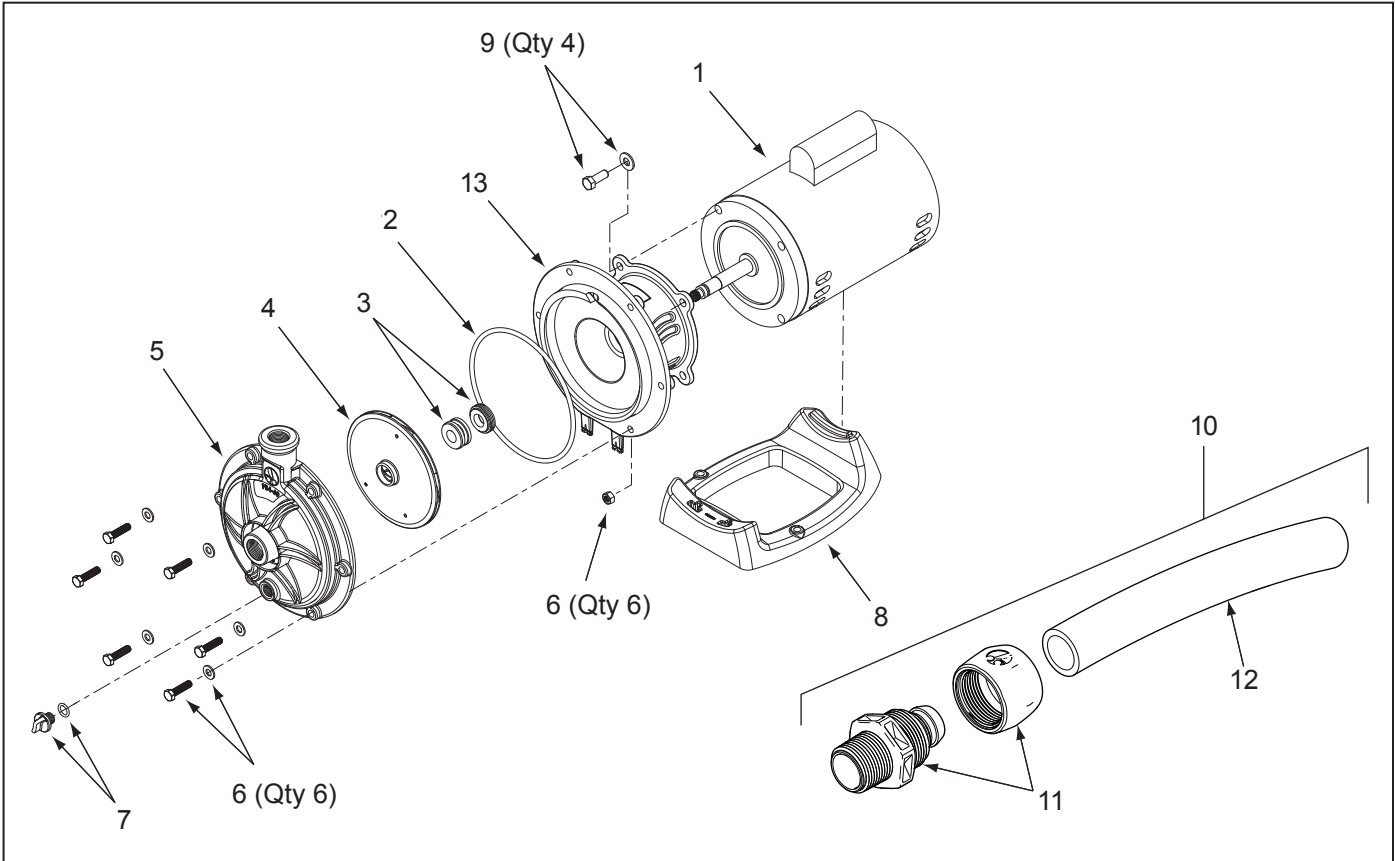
Polaris PB4-60 Booster Pump Exploded View
